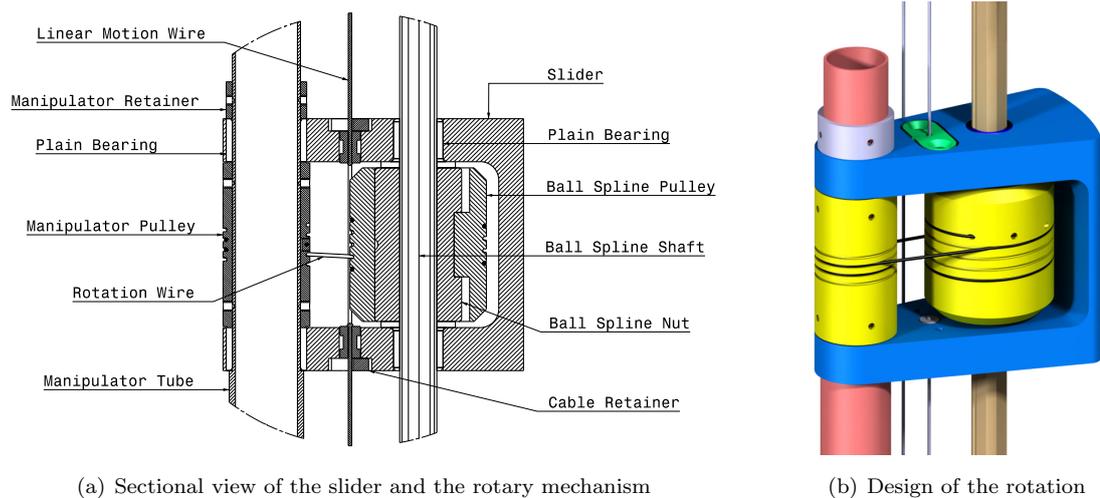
Design of the rotation mechanism: a) Sectional view illustrating the implemented components b) 3D view of the rotation mechanism of one manipulator
